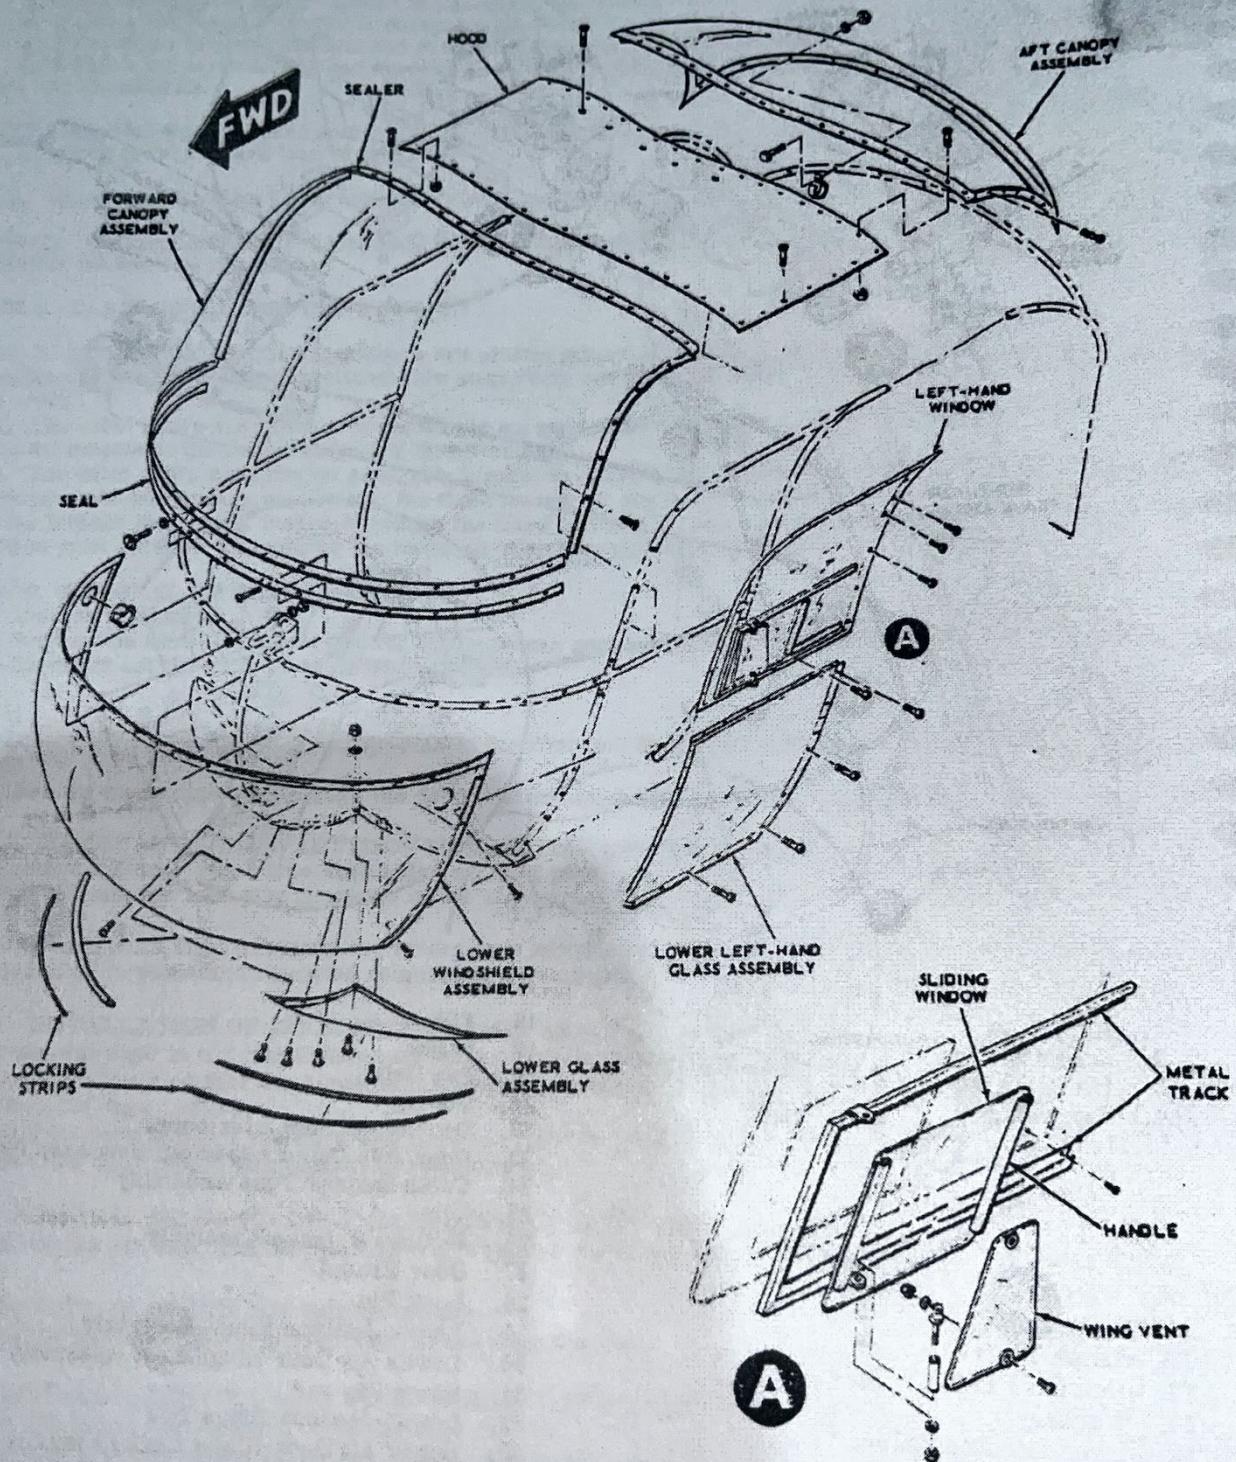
I. Canopy, Lower Windshield and Windshield Glasses, Four-Place Configuration
